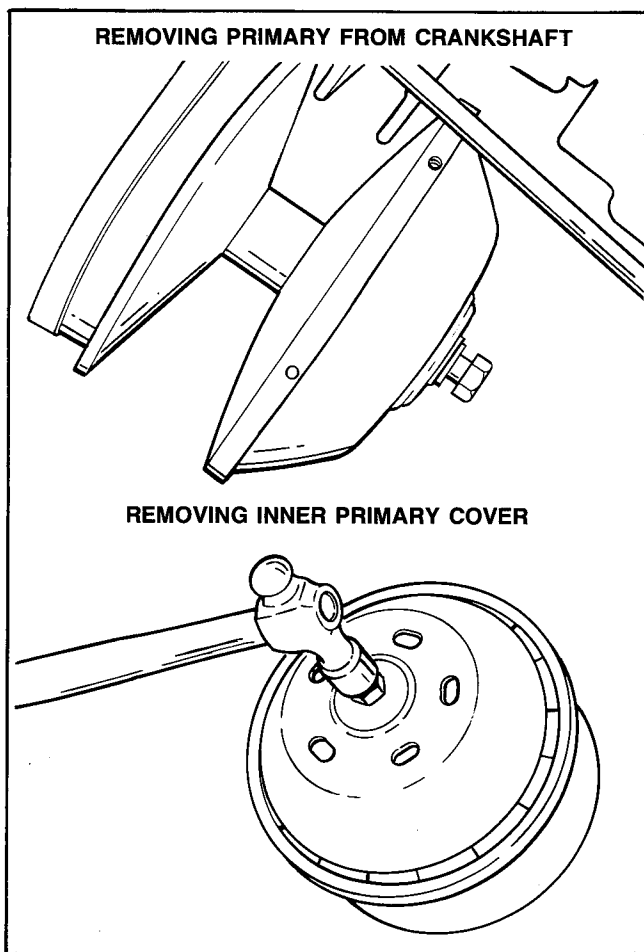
Removing Primary Drive Floating Flange and Drive Cover
